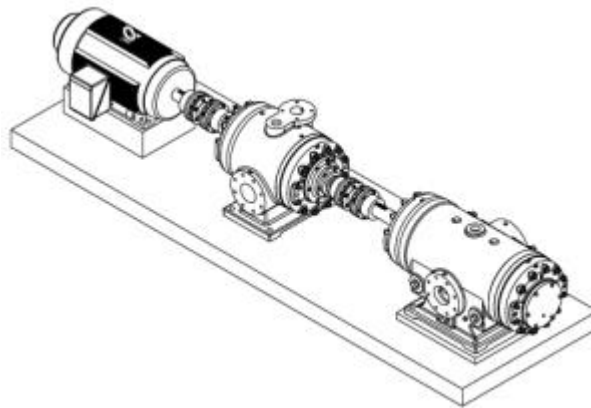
Example of a 2 stage compressor train driven by one electric motor. (Couplings sold by others.)
